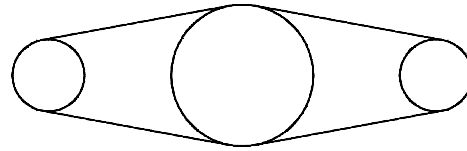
Sketch after mirroring the geometries and deleting the mirror line
